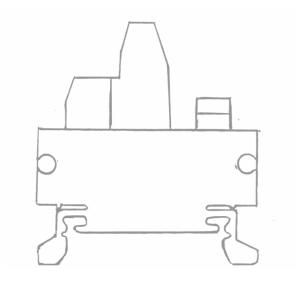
Auxiliary Terminal Board Assembly Side View
